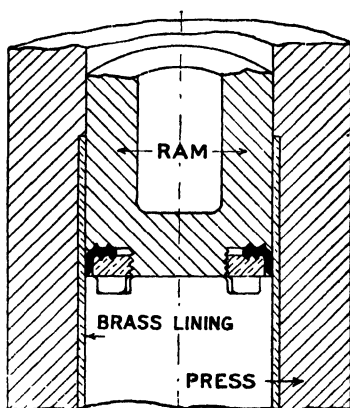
Cylinder (in section) of hydraulic capstan.
